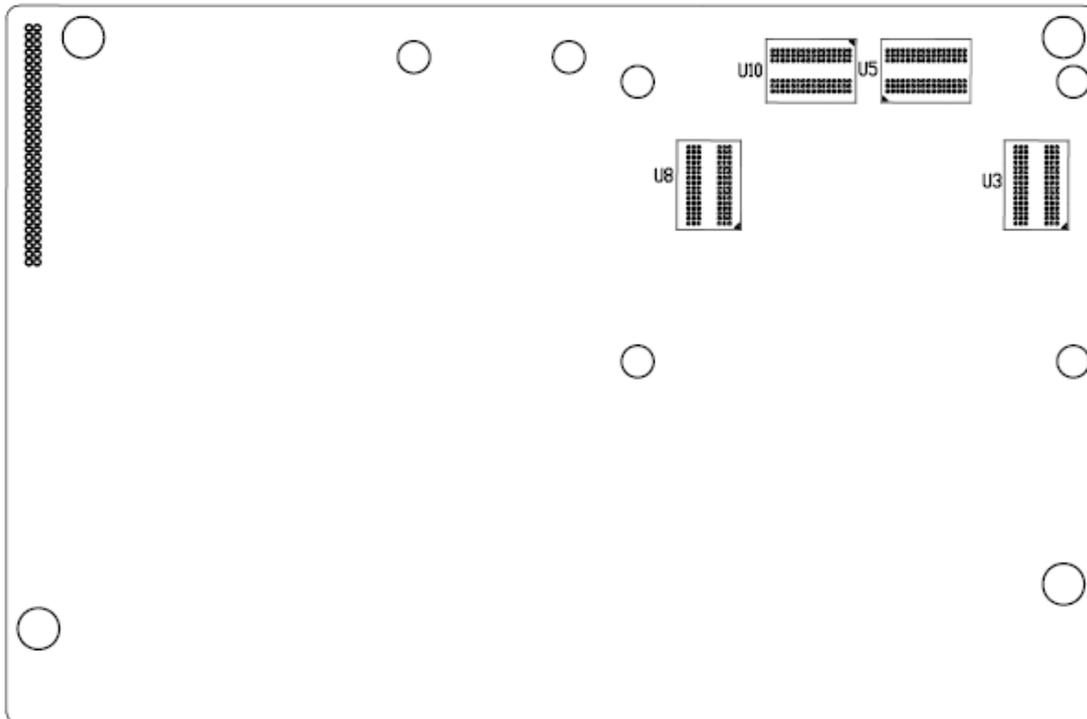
Jumpers and Connectors Location- Board Bottom
